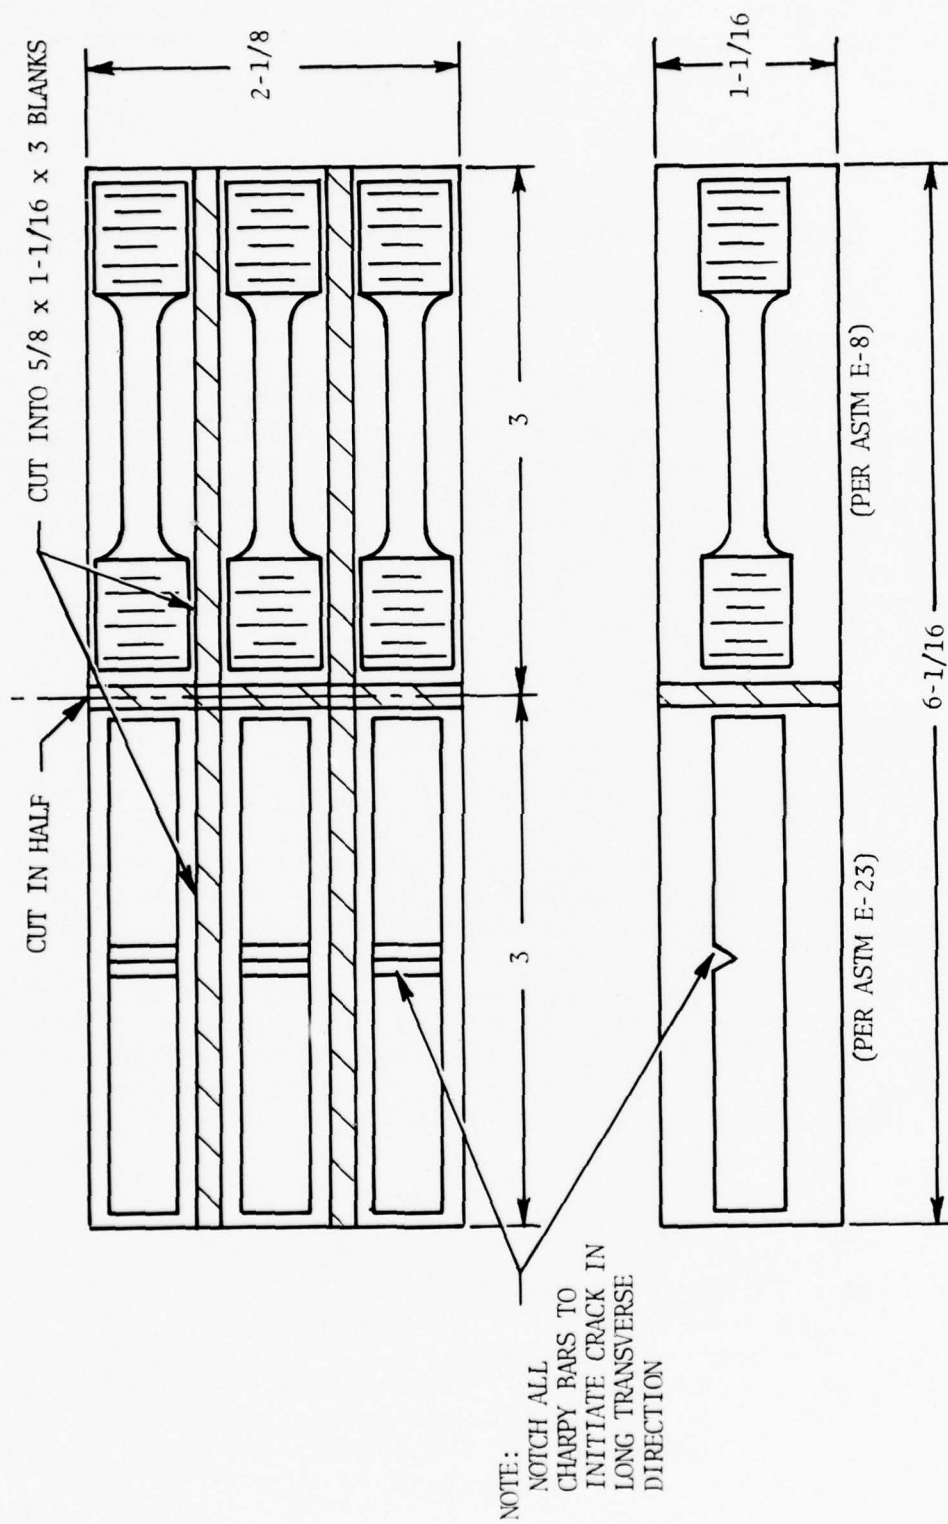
Sectioning and machined of AF1410 specimens for mechanical testing.
